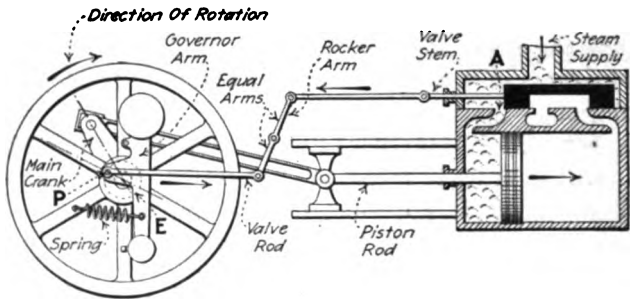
Method of governing with shaft governor and slide valve. (Takes steam for nearly full stroke.)
